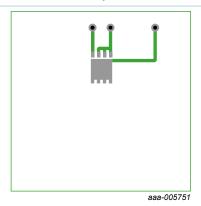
PCB layout for thermal resistance junction to ambient minimum footprint; FR4 Board; 2oz copper
